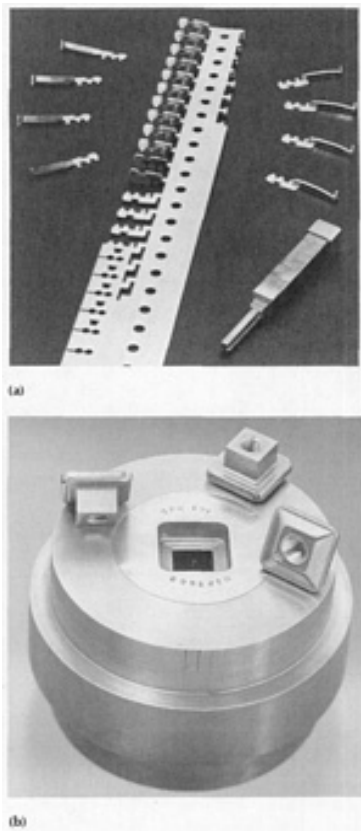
Examples of PM tool steel punch and die applications. (a) Stamping and forming. (b) Powder metal compaction
